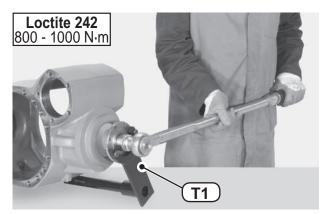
Apply wrench to the ring nut (1) and bar-hold T1 (See drawing T1 p. 90) to the pinion (5). Lock the wrench T1 (See drawing T1 p. 90) and rotate the pinion using a torque wrench, up to a minimum required torque setting of 800 - 1000 N·m.
